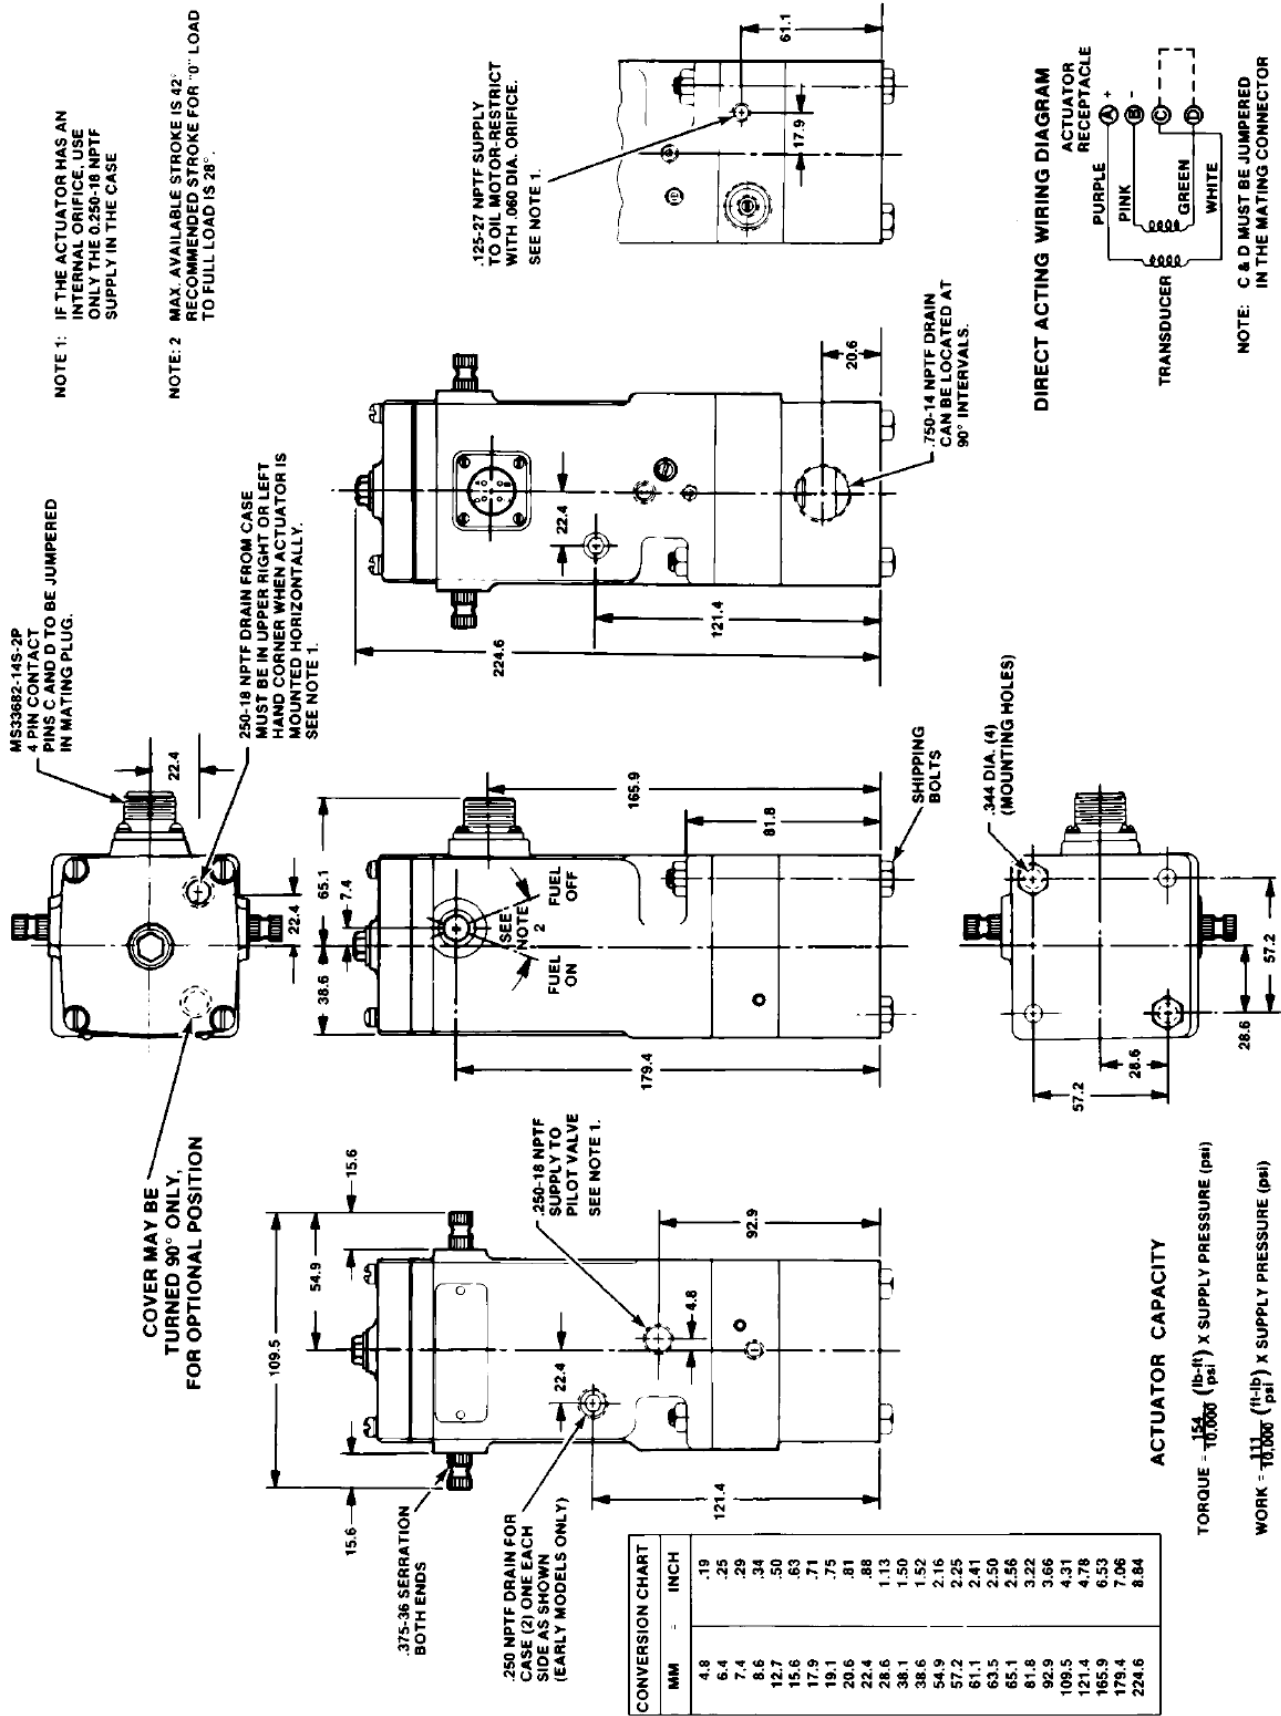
Outline Drawing (EG-3P with Oil Motor)
